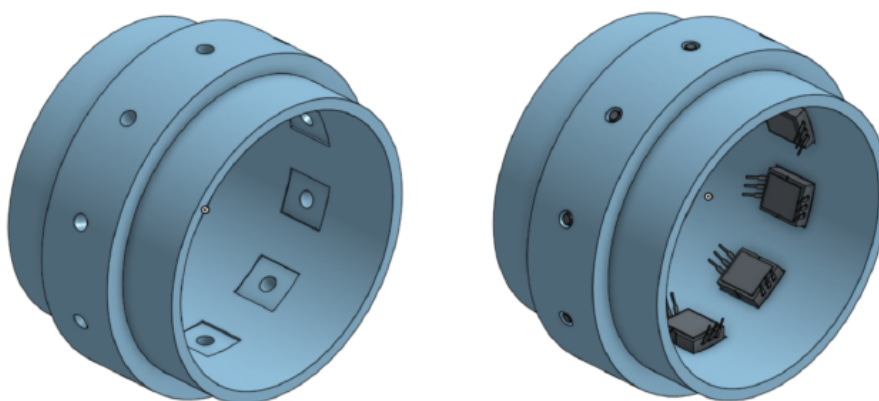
Cylinder design 1b: center piece with (right) and without (left) pressure transducers
